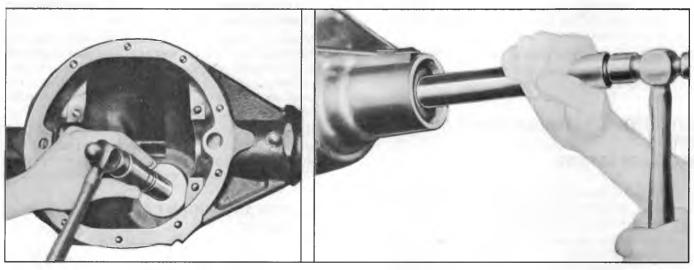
A-Drive Pinion Front and Rear Bearing Cup Installation
